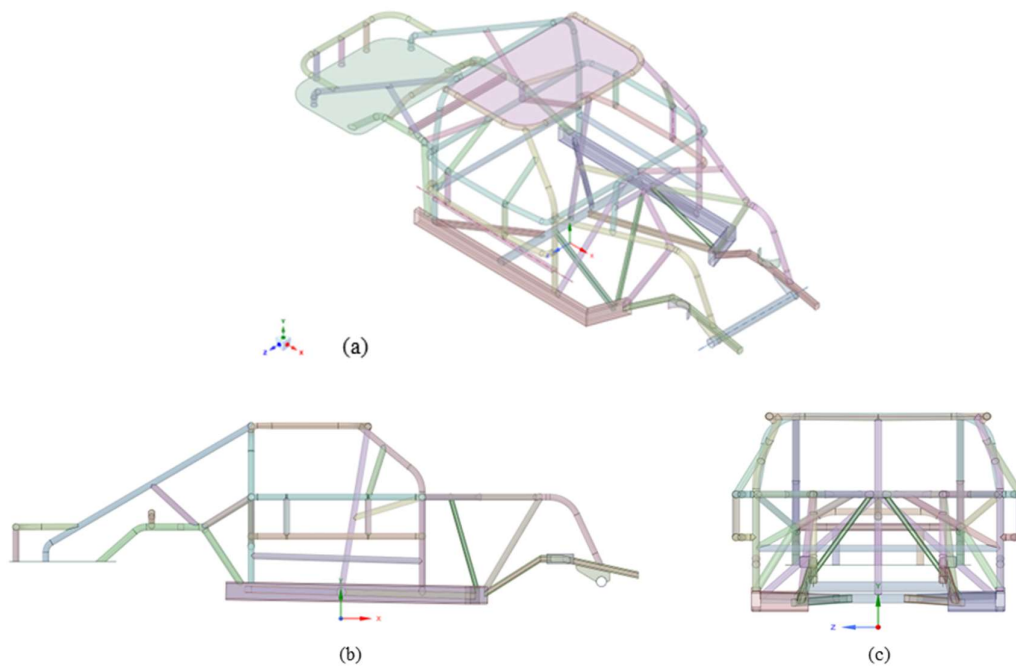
(a) Isometric view, (b) Side view, and (c) Front view of the Car Frame
